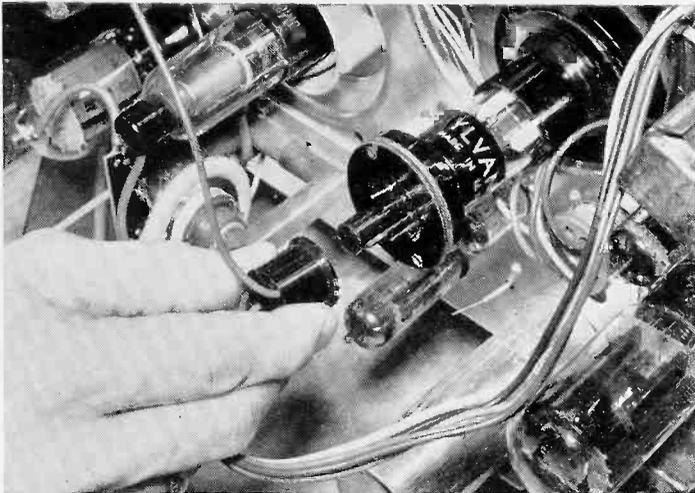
Rigid-pin socket being installed on adaptor-equipped 8YP4 base.
